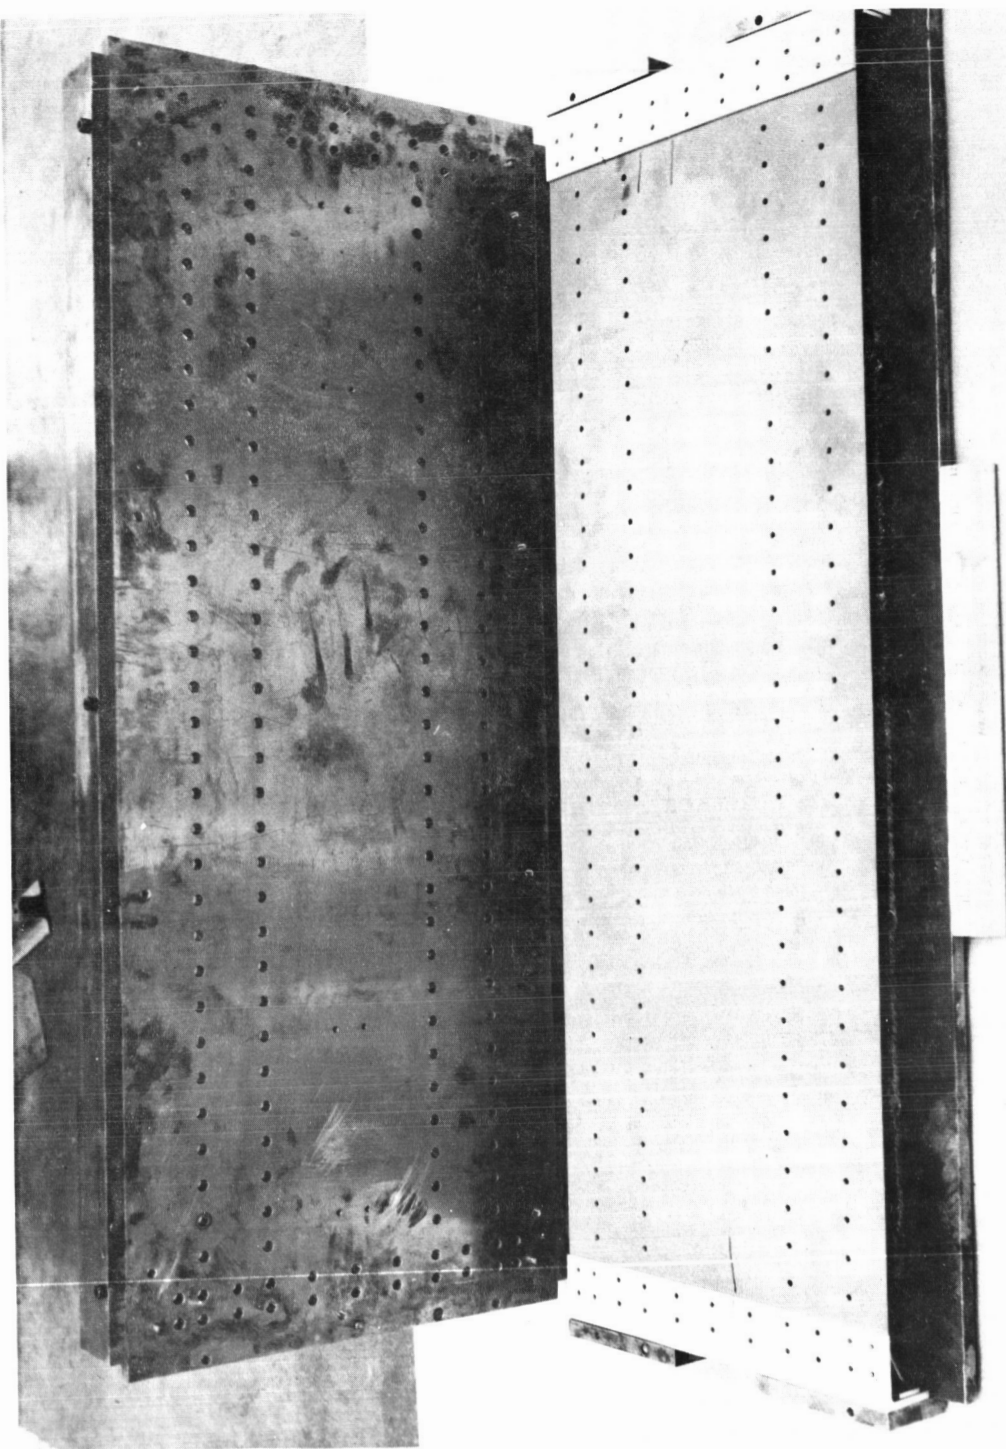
DRILL JIG WITH INSTALLED "HAT"
